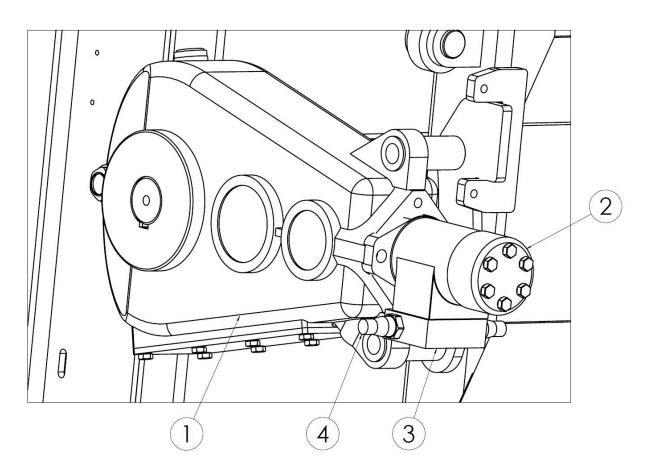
The drive of the floor conveyor 1 – gearbox, 2 – hydraulic motor, 3 – overload valve, 4 – valve seal
